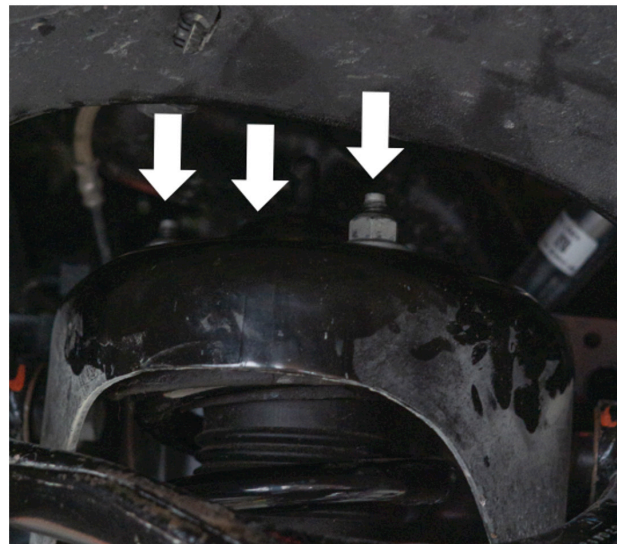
Remove the three top hat nuts. DO NOT remove the center nut that holds the shock assembly together.
